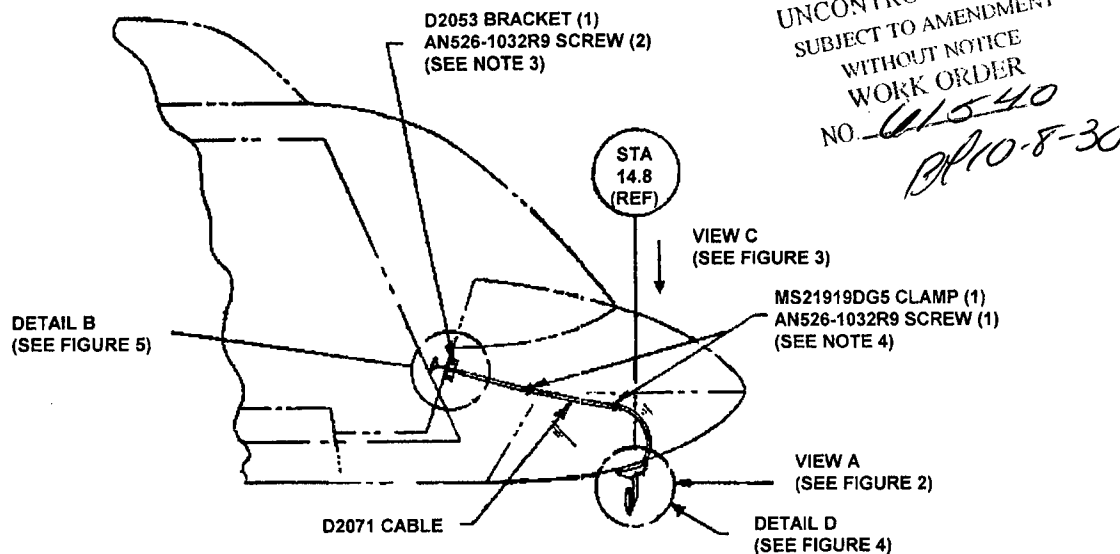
D206-558-041/-043 Cargo Mirror Installations (Shown in Deployed Position)
